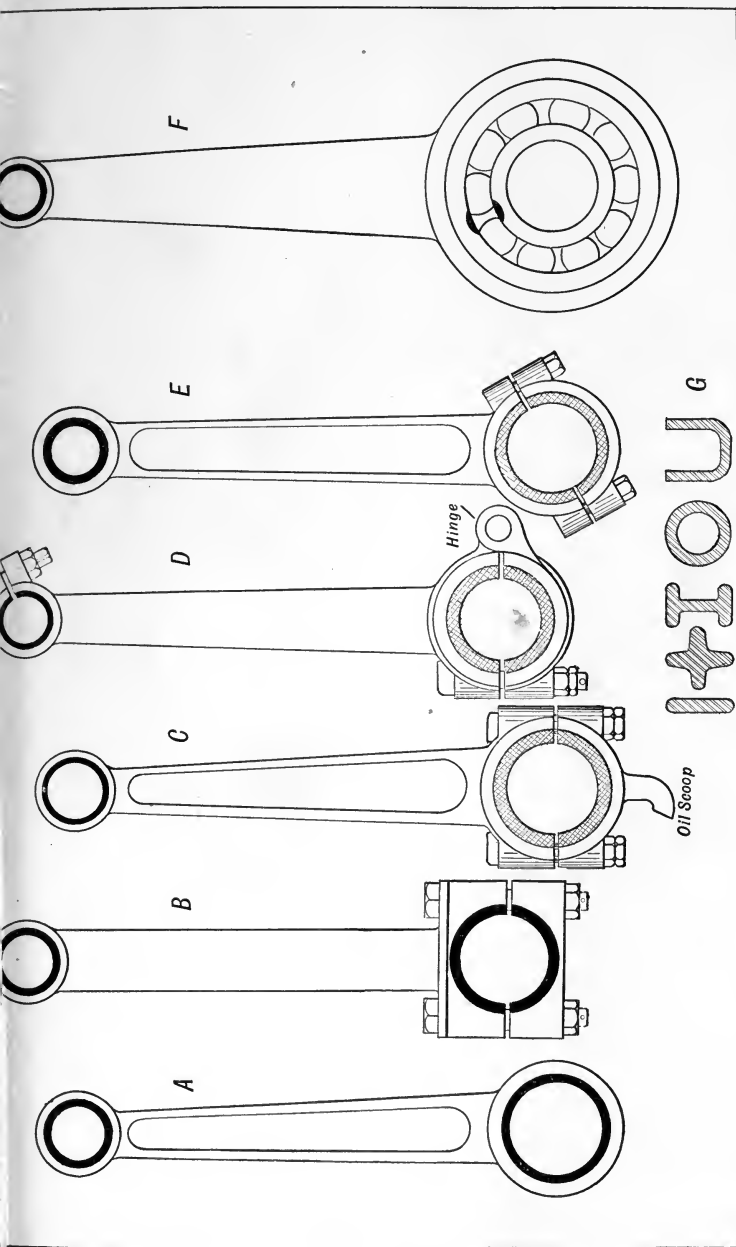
Connecting-Rod Types Summarized. A—Simple Connecting Rod Made in One Piece, Usually Fitted in Small Single-Cylinder Engines Having Built-Up Crank Shafts. B—Marine Type, a Popular Form on Heavy Engines. C—Conventional Automobile Type, a Modified Marine Form. D—Type Having Hinged Lower Cap and Split Wrist-Pin Bushing. E—Connecting Rod Having Diagonally Divided Big End. F—Ball-Bearing Rod. G—Sections Showing Structural Shapes Commonly Employed in Connecting-Rod Construction.
